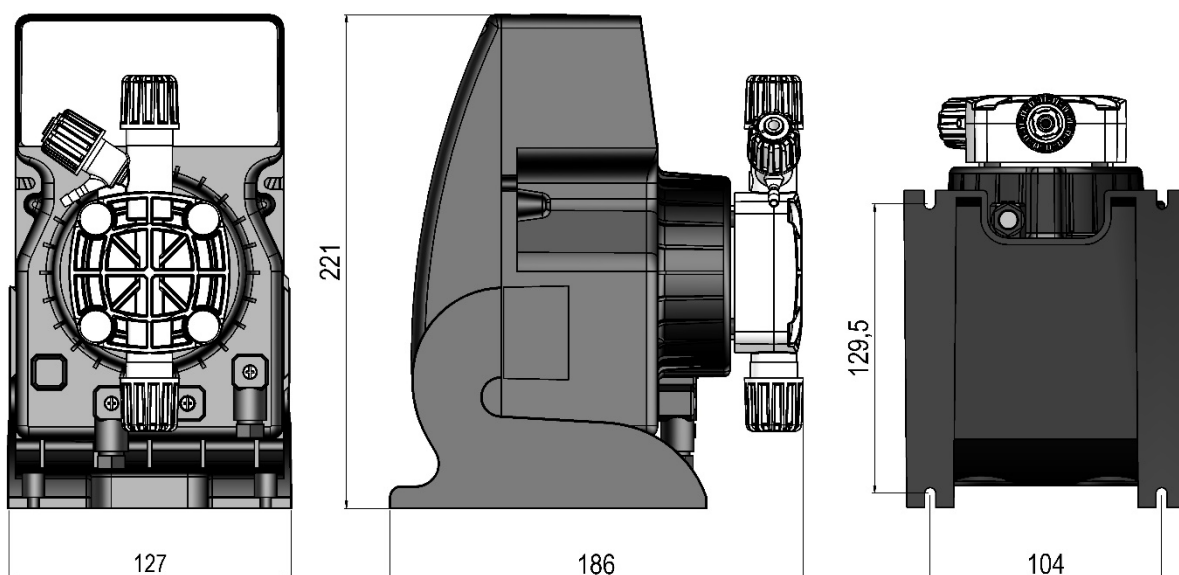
PBM pump, base-mounted (dimensions indicated in mm.).
